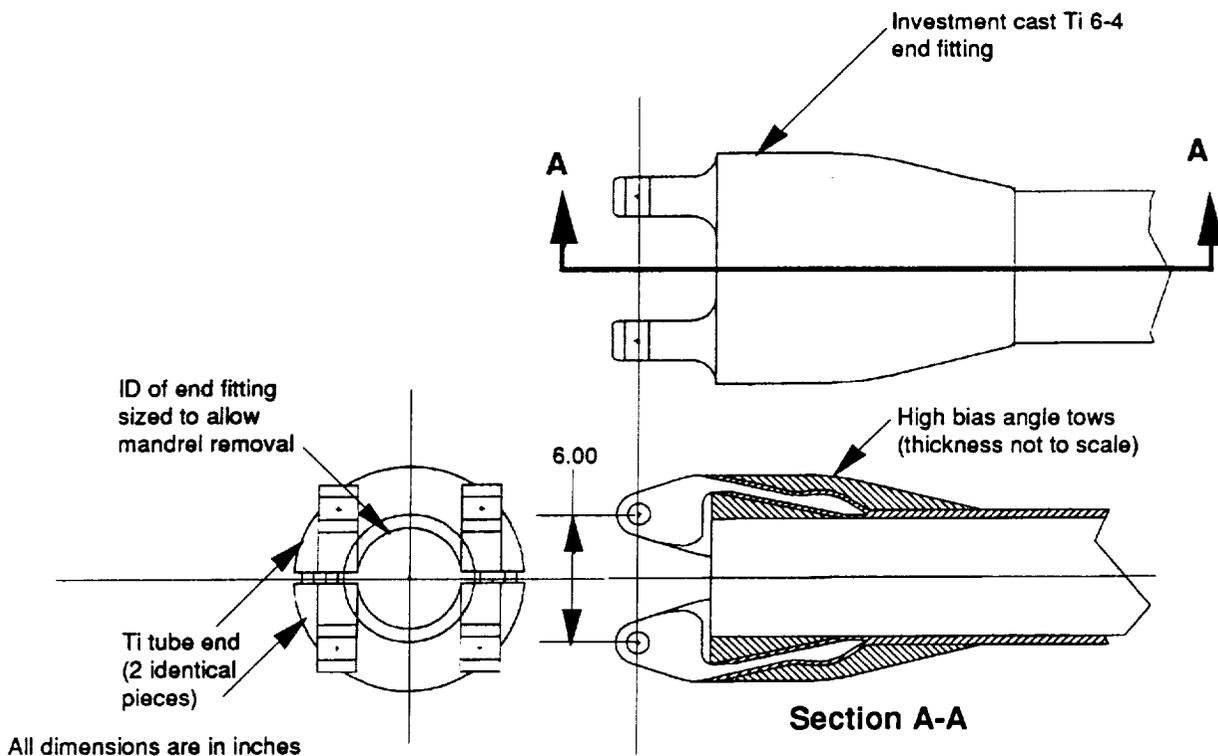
Tube End Attachment (2-piece Ti ends integrally wound onto Gr/Ep tube)
